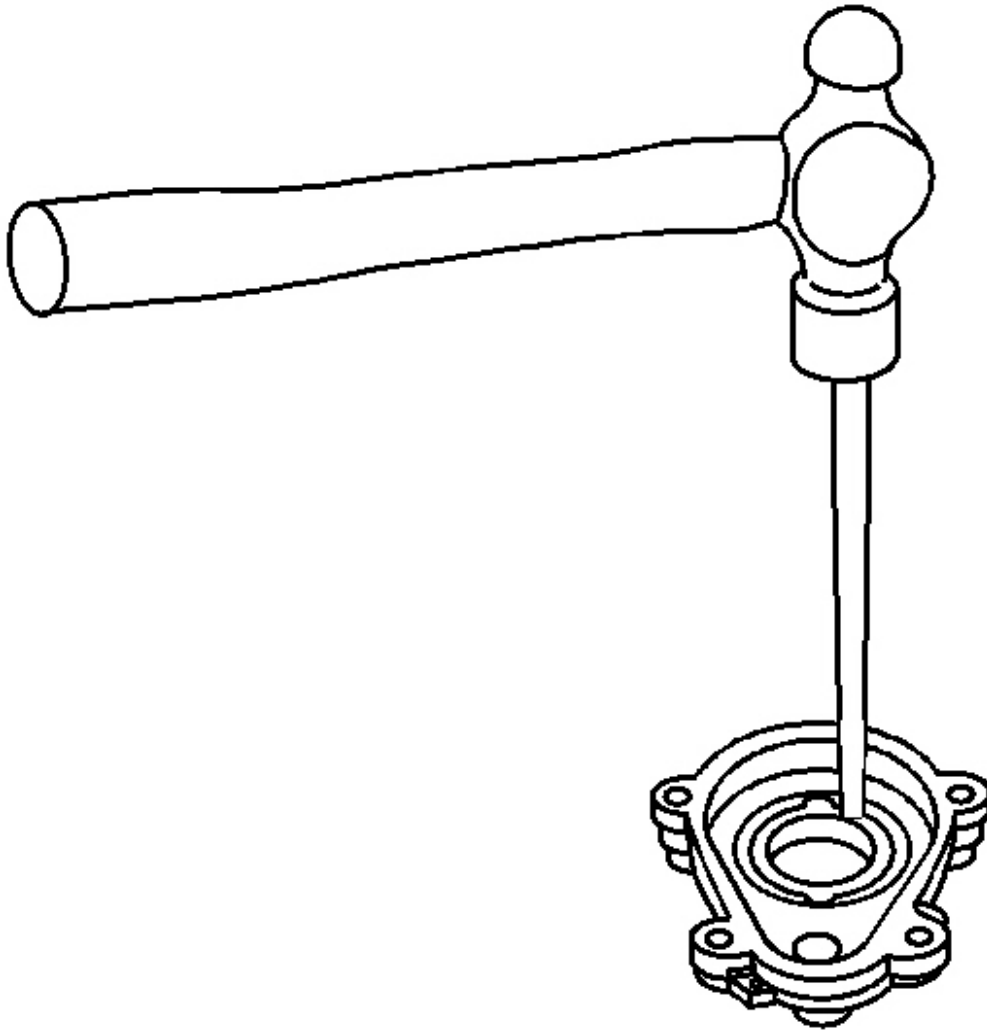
Removing Bearing From Inner Intermediate Shaft Bearing Case Half
